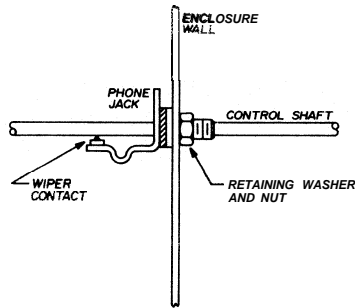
A single-circuit phone jack makes a good grounding device for a 6.5-mm (1/4-inch) diameter shaft. The jack is mounted in the shaft hole, which is drilled out to accept the jack. The wiper contact of the jack rides on the shaft as it is rotated. The contact arm of the jack is grounded to the enclosure wall. Jack is positioned so that wiper arm is inside amplifier box.
